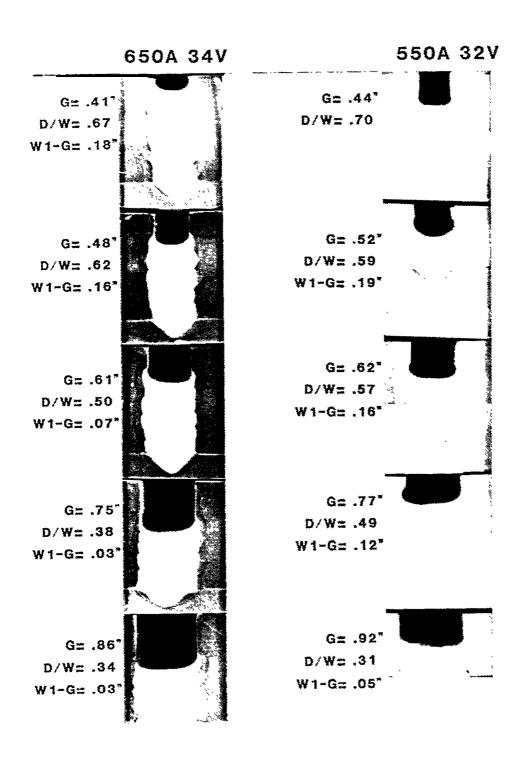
Cross Sections of 2x2 mm Solid Electrode Welds
